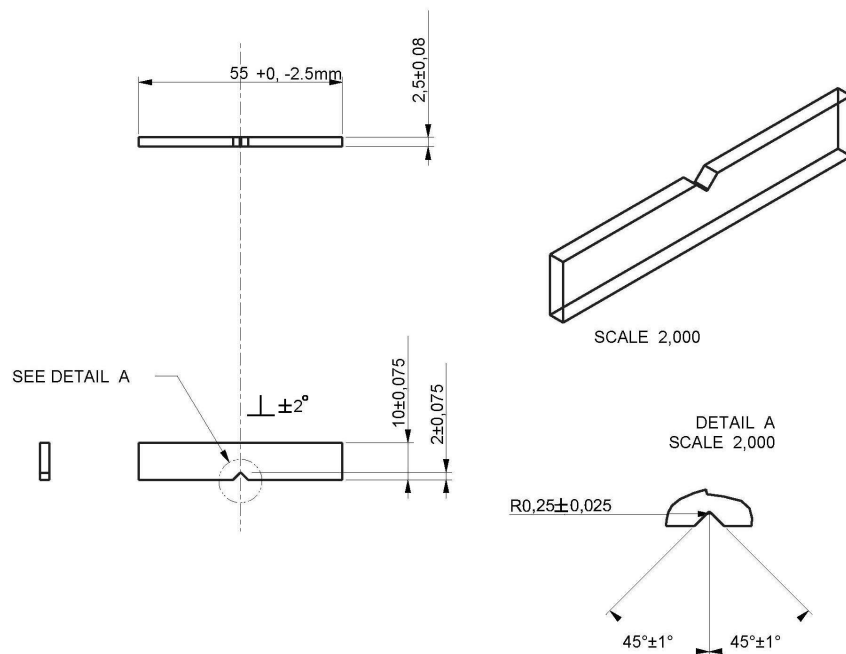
Sub-size Charpy specimen geometry and dimensions - Specimen dimensions in millimetres, derived from ASTM standard (153).
